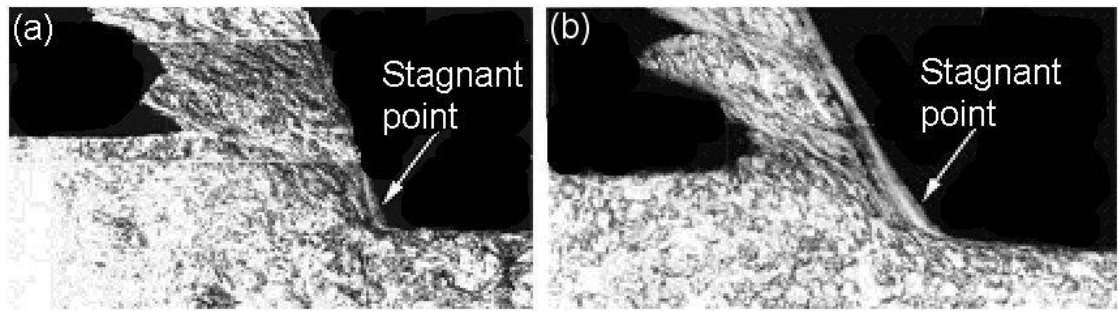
Chip formation with different rake angles. Cutting conditions: workpiece, 0.45% C carbon steel (S45C); tool, cutting speed, 10m/s; (a) 70 μm feed/tooth, -20° rake angle (b) 40 μm feed/tooth, -30° rake angle [84].
